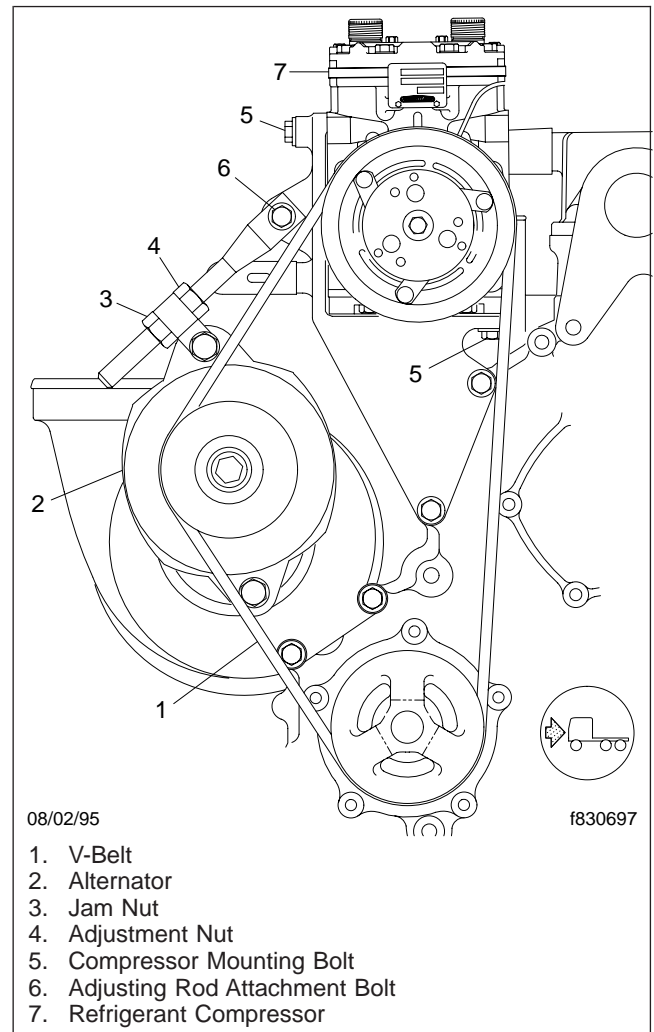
, Compressor Mounted on a Detroit Diesel Series 60 Engine
